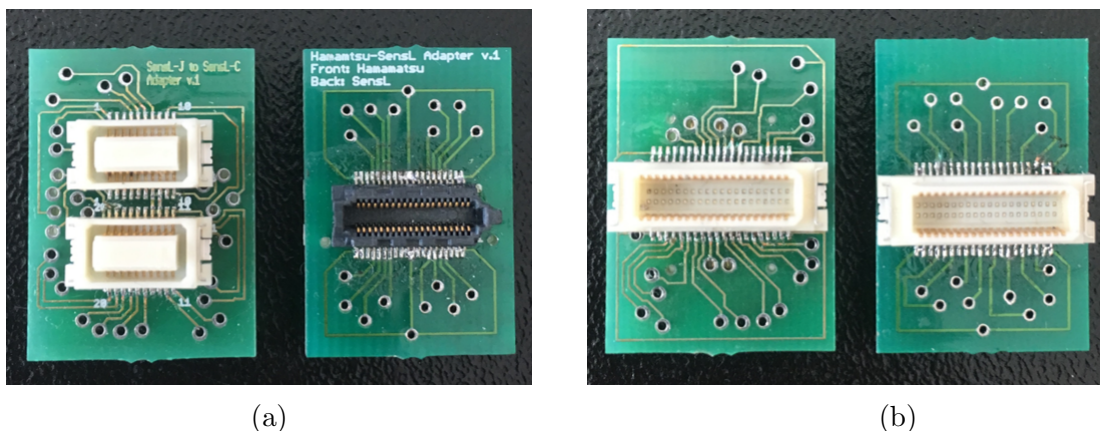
PCB adapter boards. (a) Front side of adapter boards, with SiPM-J (left) and MPPC (right) input connectors. (b) Back side of adapter boards with SiPM-C connectors.
